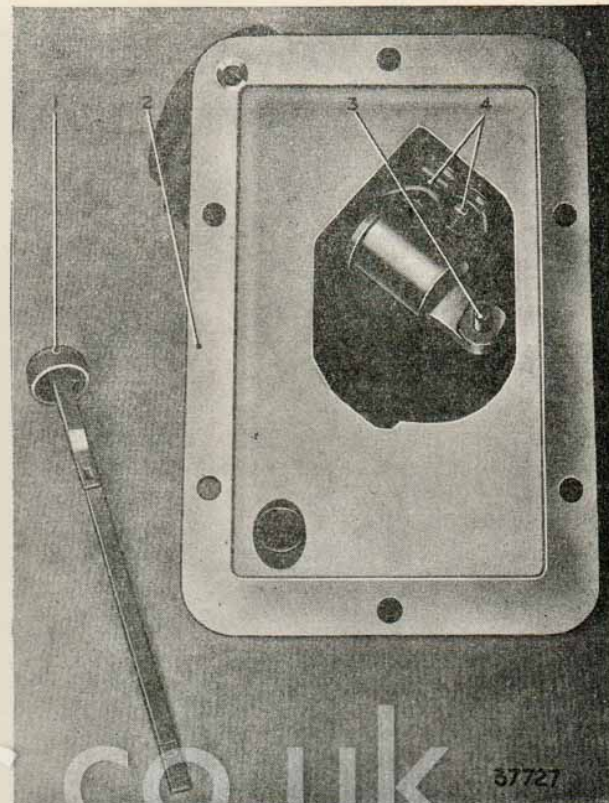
INSPECTION COVER HOUSING SOLENOID.
